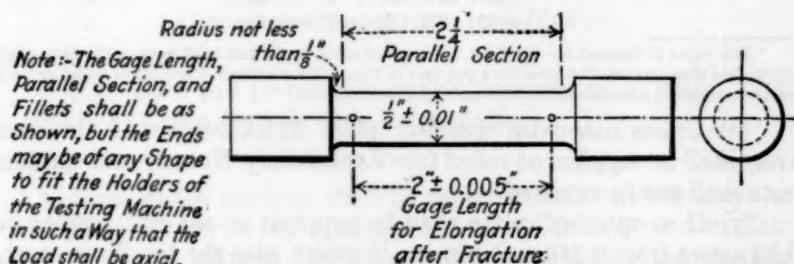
Standard 2-in. Gage Length Tension Test Specimen.
